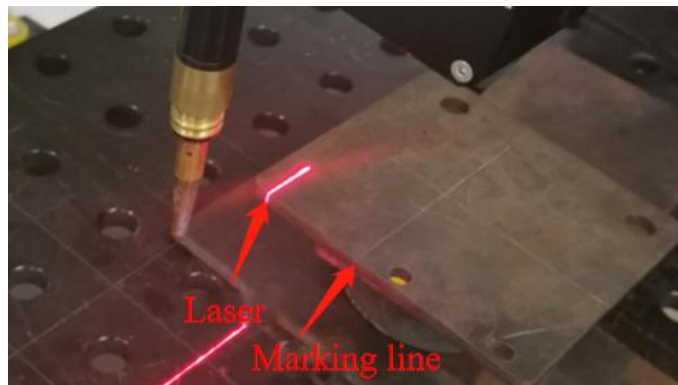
Lap joint weld seam using thin metal plates
